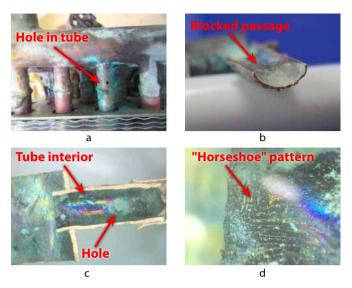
a. Erosion-corrosion failure. b. Interior of the tube, passage is partially closed by brazing material causing local accelerated flow. c. The tube interior showing deterioration signs. d. Tube interior showing "horseshoe" pattern that is typical for erosion-corrosion phenomena [6].
